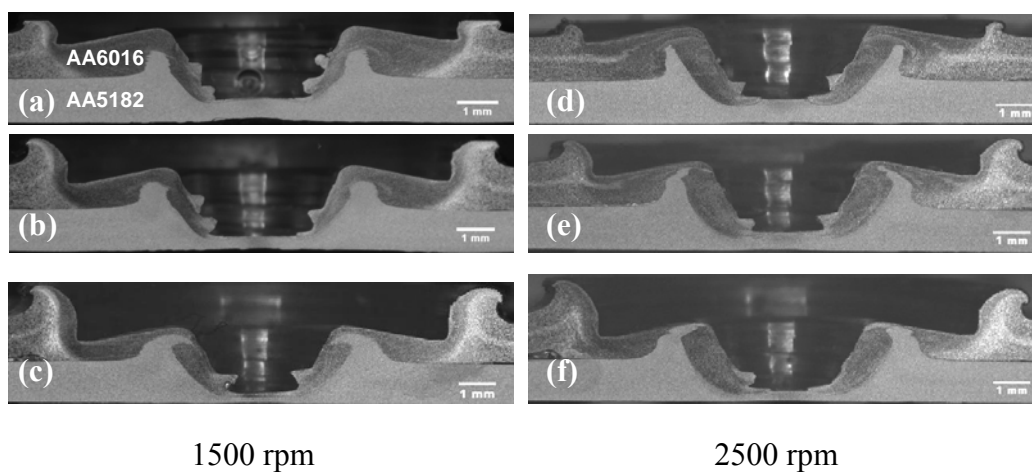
Cross sections of dissimilar spot welds.
